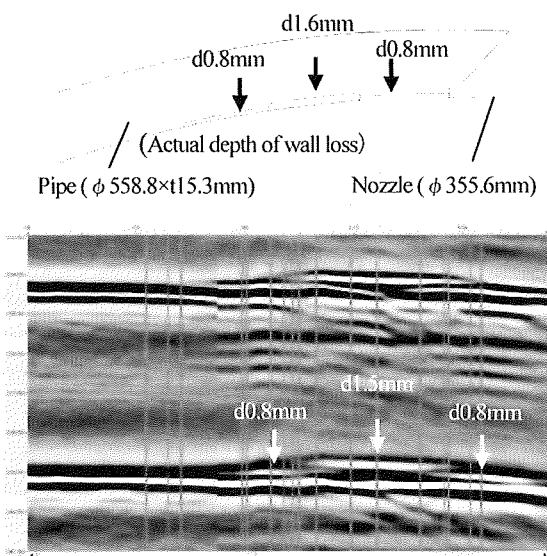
B-scan from stair-step wall loss in the circumferential direction of the test specimen A, and figures show actual depth of wall loss (top) and measured depth of wall loss from the B-scan data
